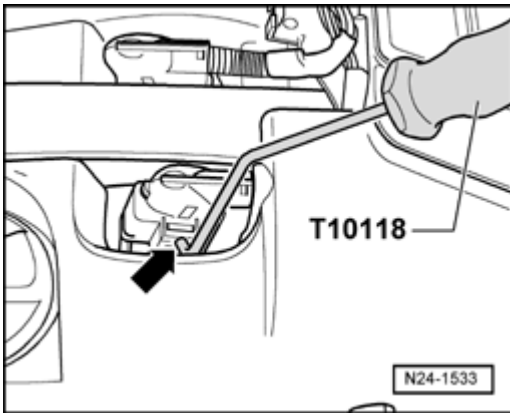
Identifying Assembly Tool T10118 On Release Button
